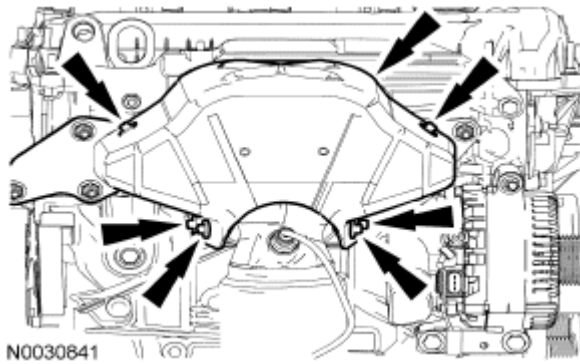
Locating Heat Shield Bolts & Heat Shield
